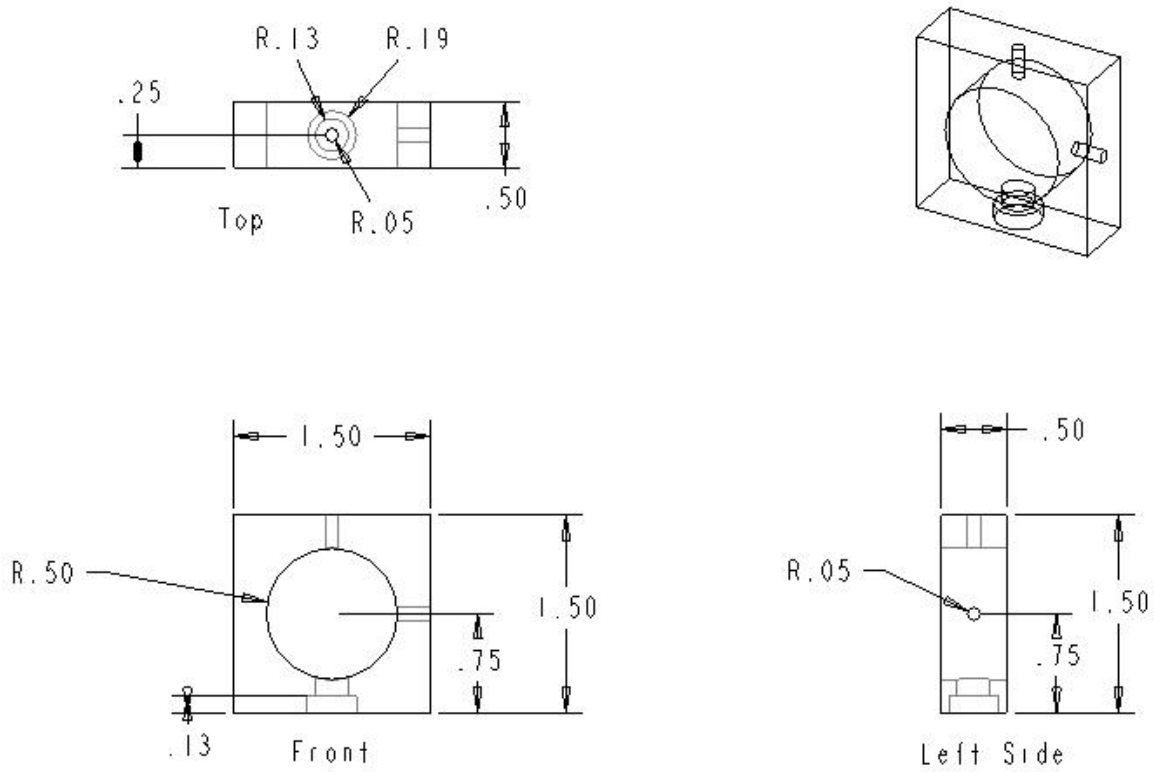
Engineering Drawings for Horizontal Axis Turbine Support Block Drawing
